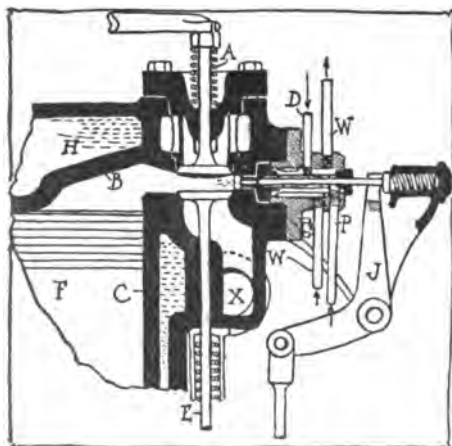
Section of the Diesel engine. The oil is forced into the cylinder by air pressure.
